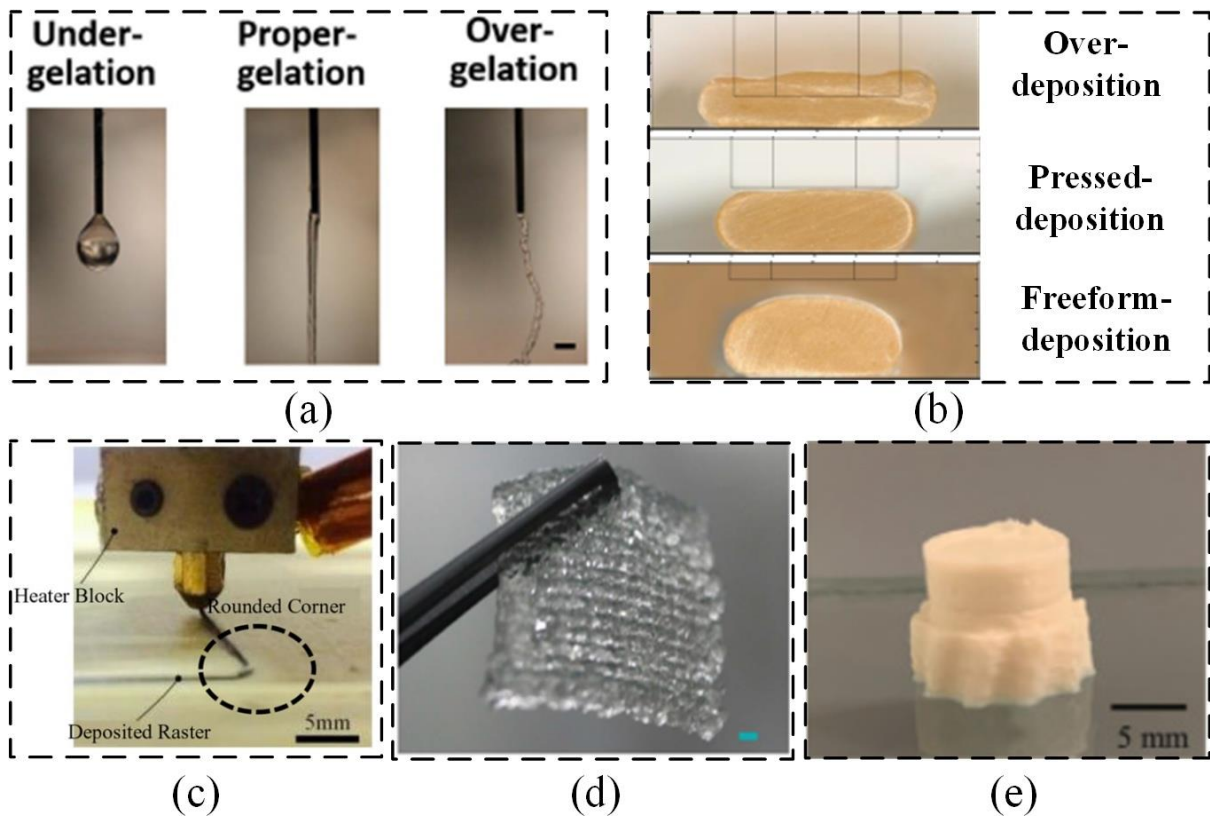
Physical photos of outputs of process modeling for DIW: (a) FEF, (b) DF, (c) deposited corner, (d) printed layer, (e) 3D part
